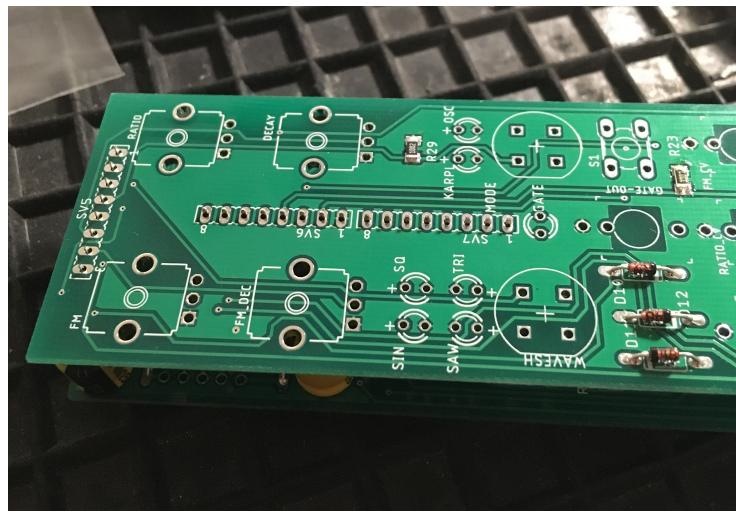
Then simply put the loose board back on the headers and solder all of those pins
